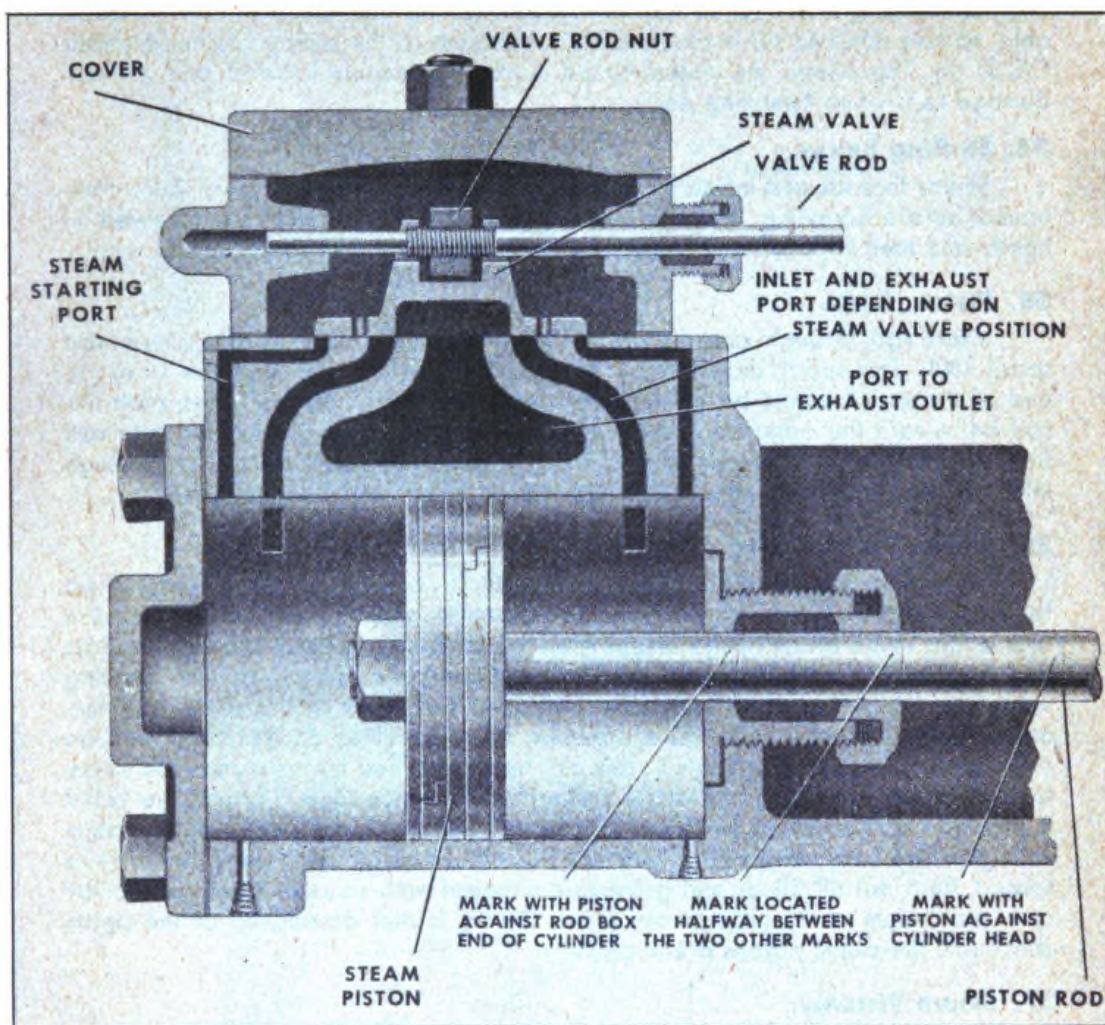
Location of Steam Piston and Steam Valve at Exact Center
